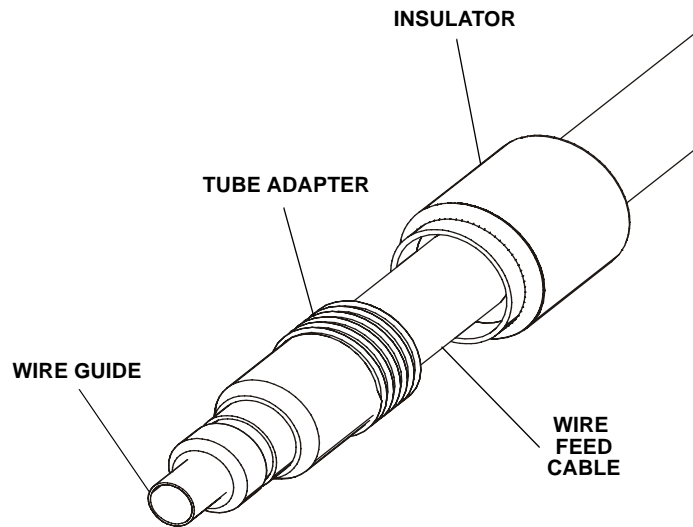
WIRE GUIDE INSTALLATION – WIRE FEED CONDUITS
